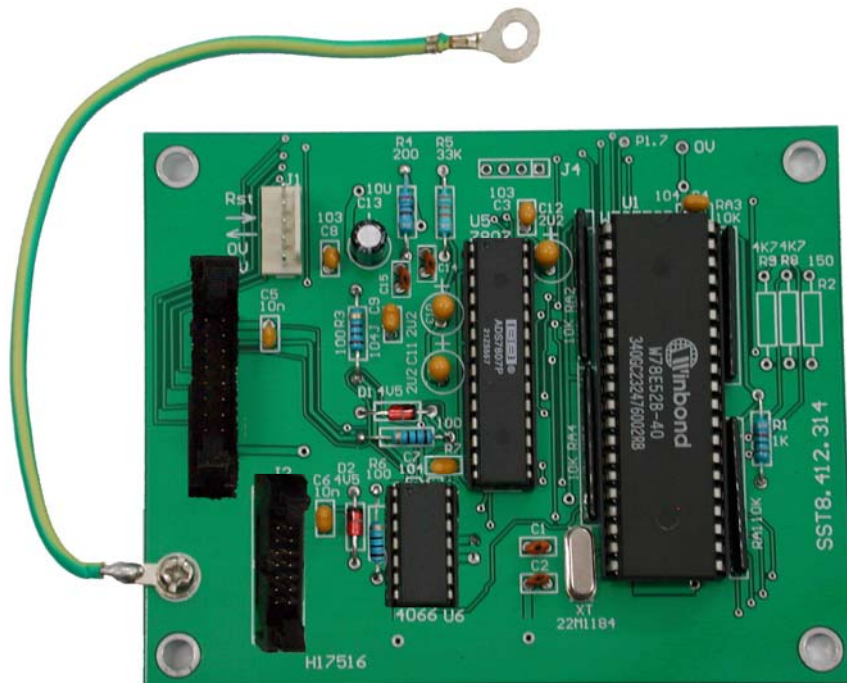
Layout of UV-4802 Slave CPU PCB
